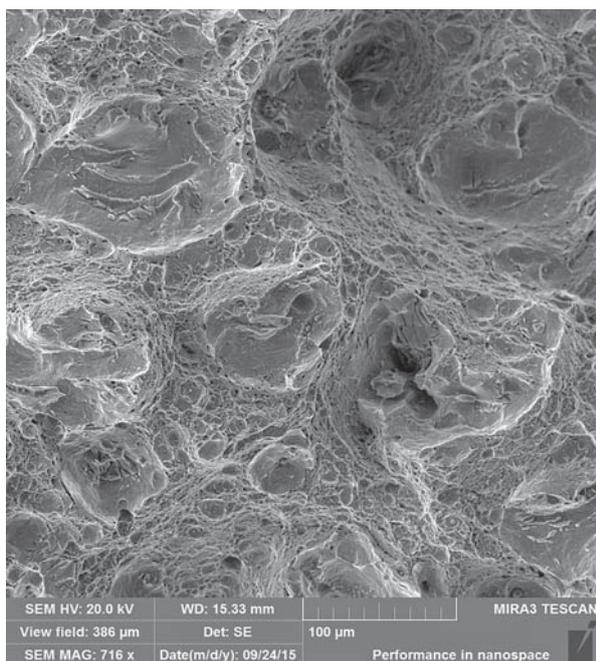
Fracture surface of specimen S3D with U - notch
